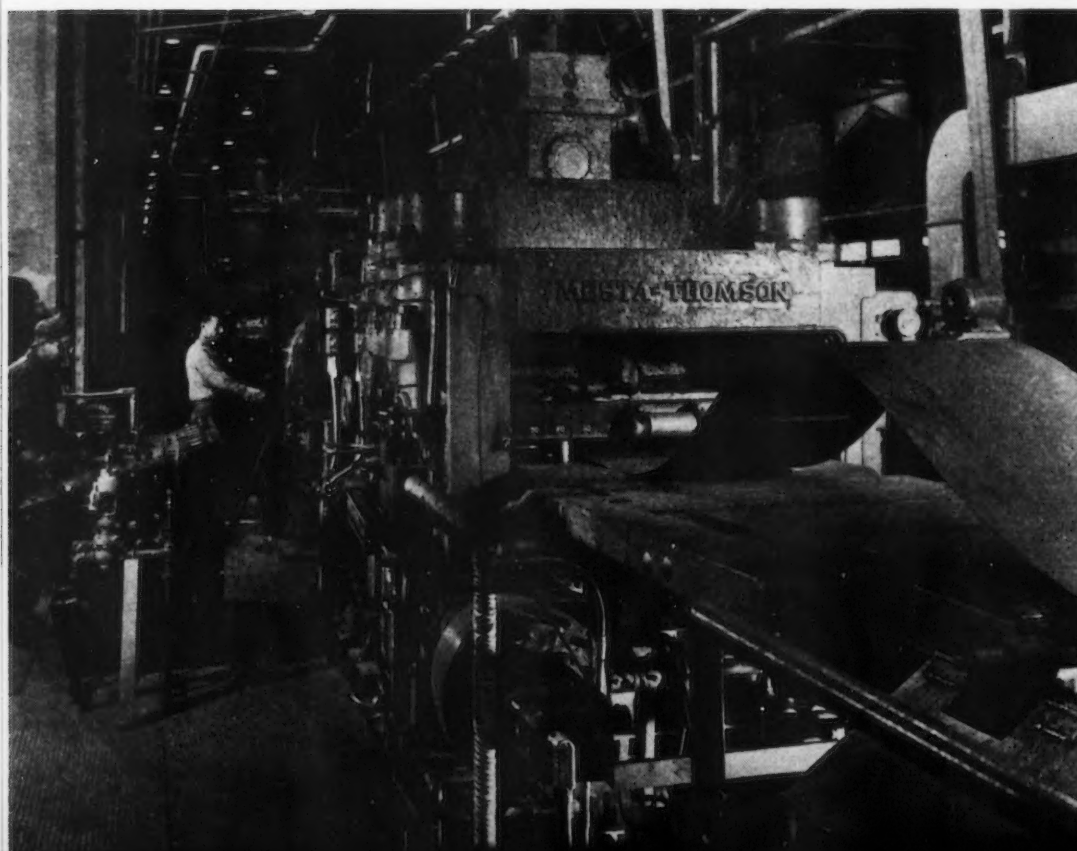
Strip being welded at the flash welder. Head of the welder, in the foreground, moves toward the stationary head as welding progresses.
